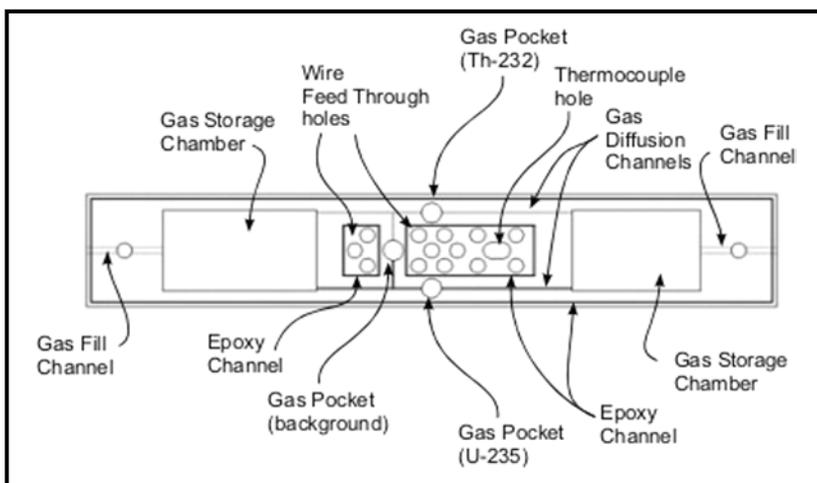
Aluminum oxide cavity (front view line drawing) piece showing the locations for feed-through wires, gas storage, diffusion channels, detector pockets, and the thermocouple. Additional epoxy channels were added to aid in bonding the parts together.
